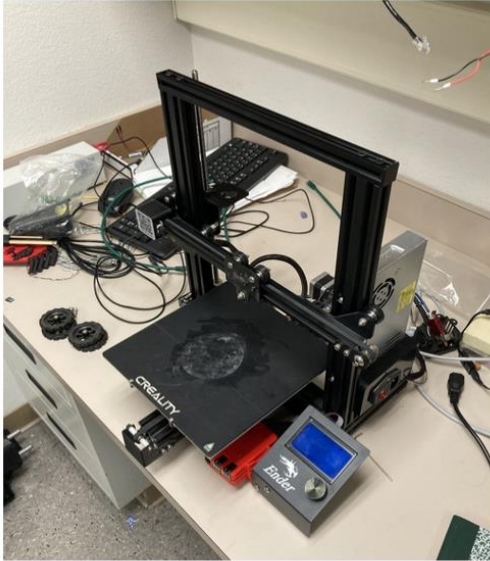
Crealty Ender-3 3D Printer (extruder head and filament drive removed)
